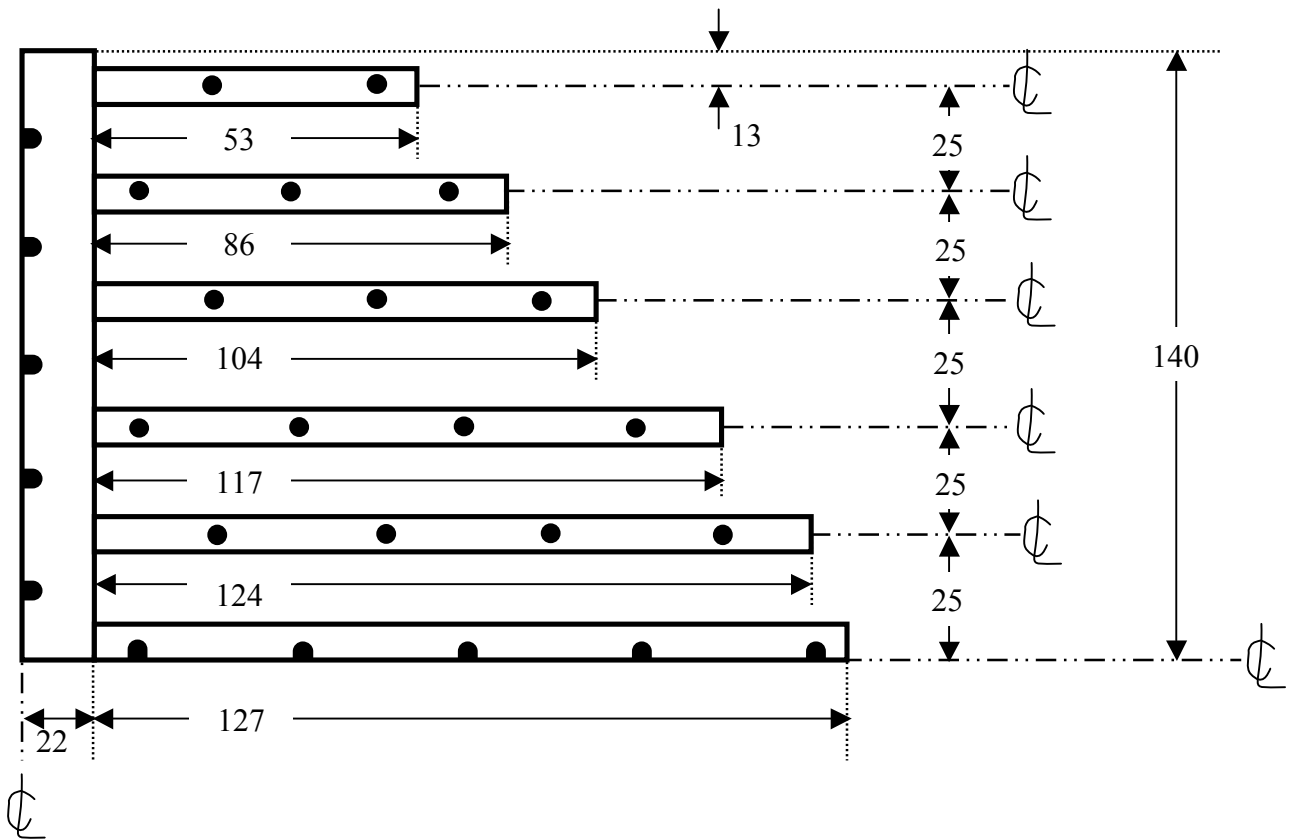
Dimensions of one quadrant of the sprayer grid. All dimensions in mm.
